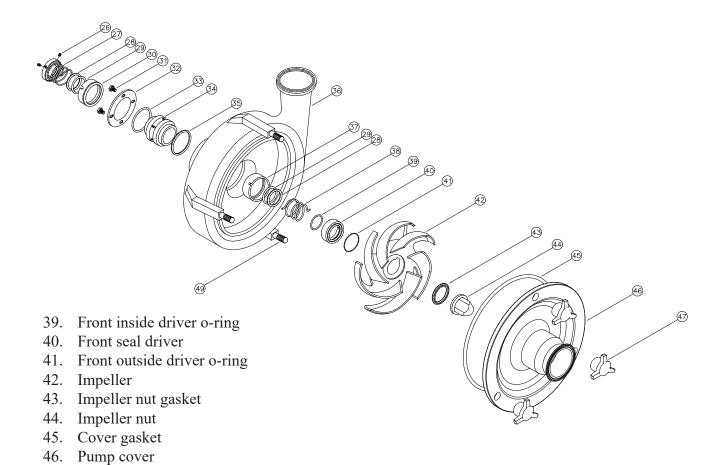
FP #1 BEARING BLOCK PUMP ASSEMBLY
